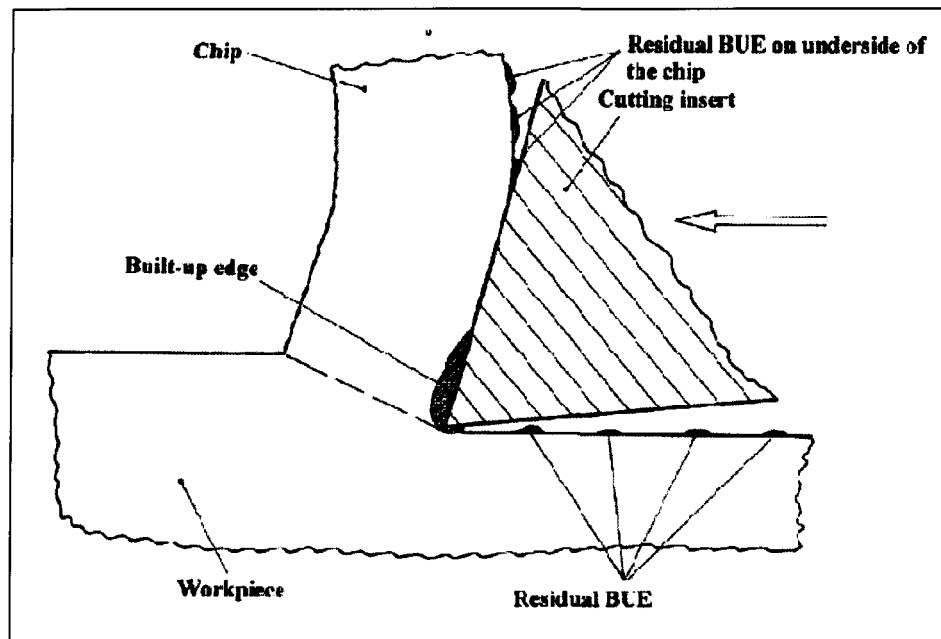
Edge build-up on the tool, and residual effects on the workpiece and chip.⁵⁰
